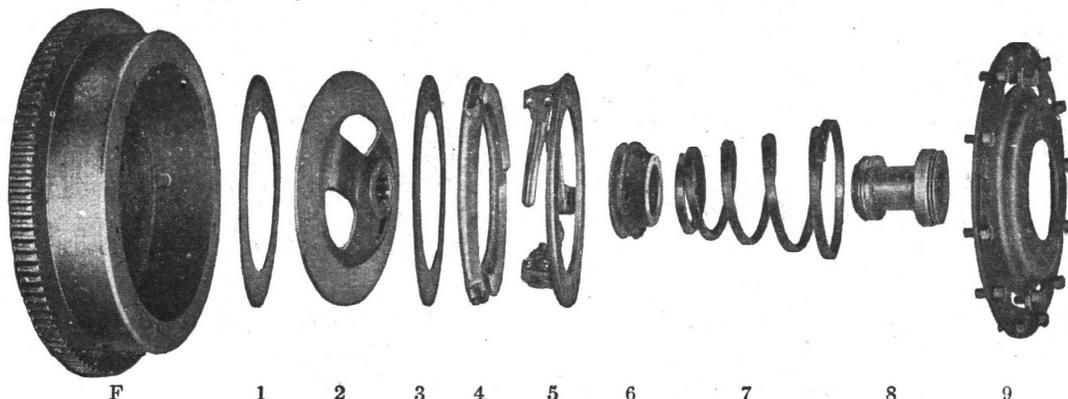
Parts of the Borg & Beck dry-plate clutch. (F) represents the flywheel ready for the clutch parts, which are shown disassembled in the order in which they are to be assembled. Note that inside of the flywheel the dowel pins that carry the thrust ring (4) are shown projecting (see also (P) Fig. 26.) The Borg & Beck Co., Chicago, are the manufacturers.
